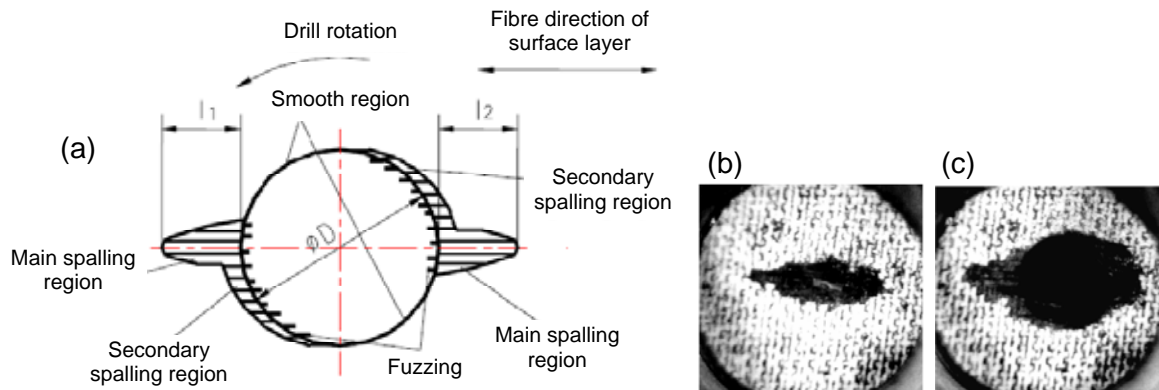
Spalling at exit surface when drilling MD CFRP: (a) schematic of spalling, (b) spalling at chisel edge penetration and (c) spalling after drilling [60]
